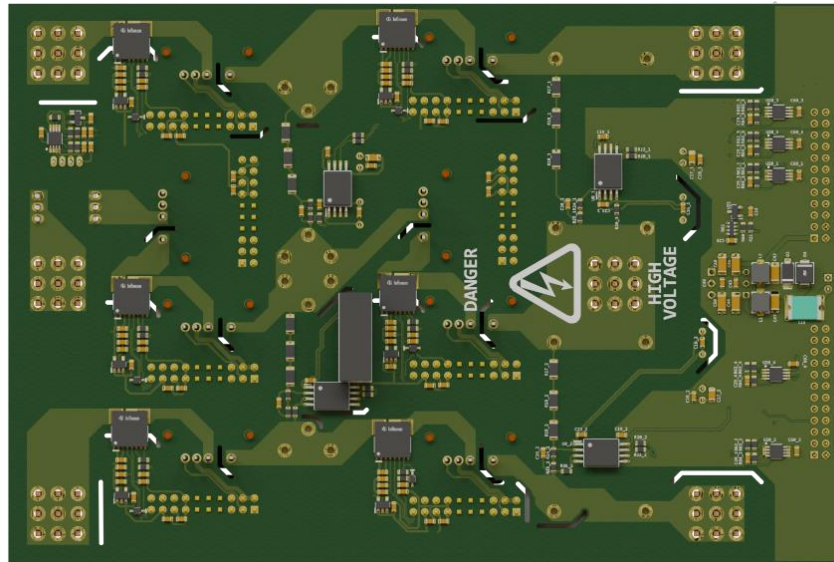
Rendering of the bottom side of the converter PCB.
